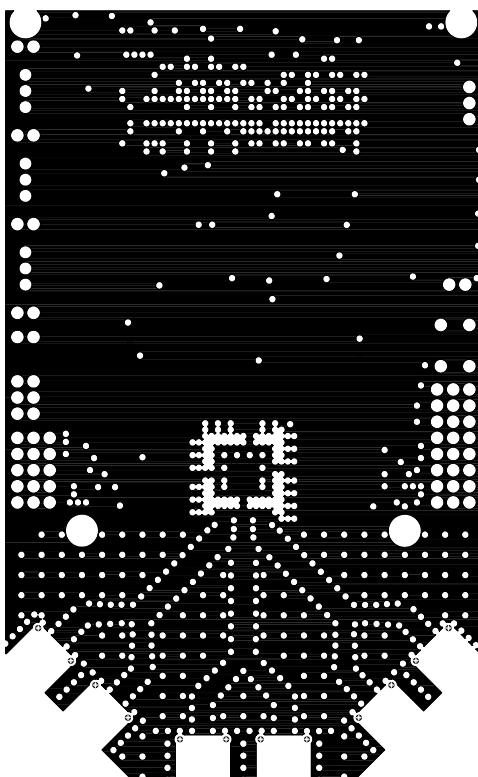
Si5100-EVB Layer 5—VDD Plane (Daughter Card)
